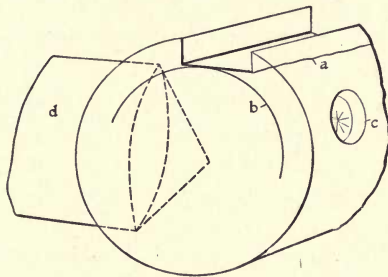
HOLDING POWER OF SET-SCREWS AND KEYS.
